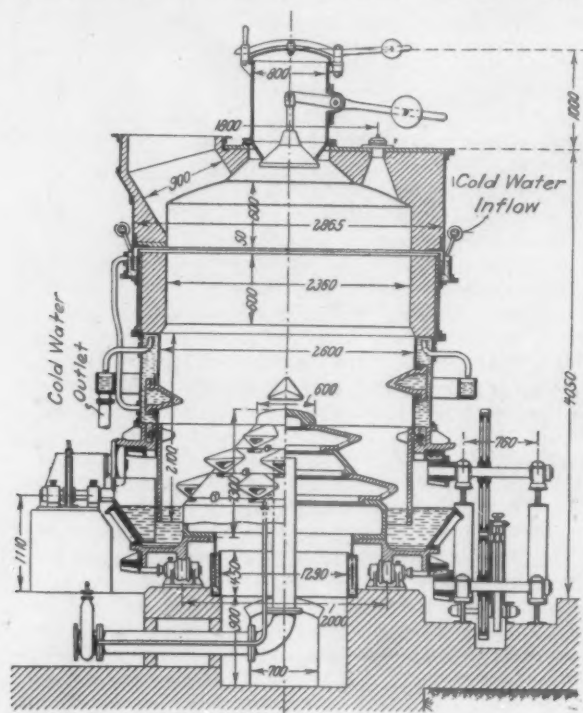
Section of the Küppers Gas Producer. Dimensions Are in Millimeters.
